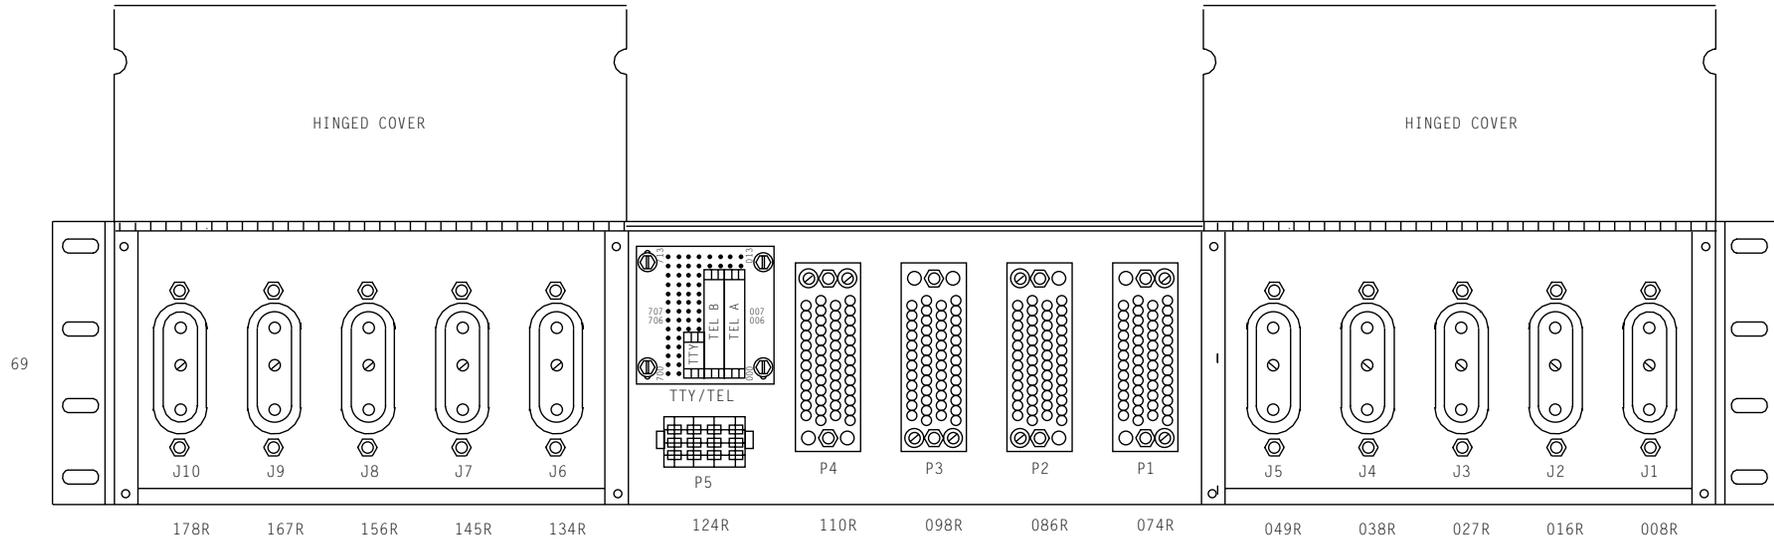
Sample Layout of XTSI Cabinet Fuse and Filter Unit (Rear View)
